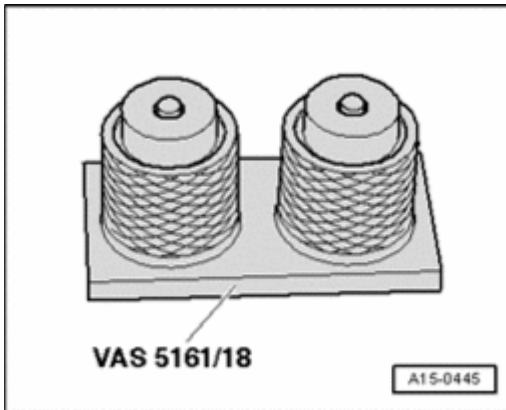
Identifying Installation Cartridge VAS 5161/8
